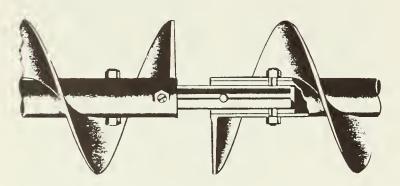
Conveyor shaft coupling. Source: Syntron and link-belt material handling equipment.
